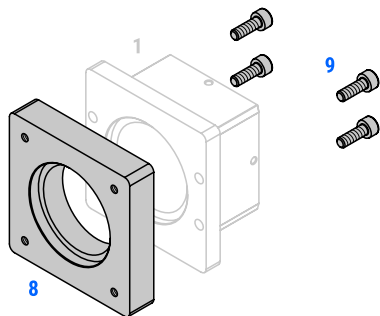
Additional parts of the non-standard motor adapter VK MG.
